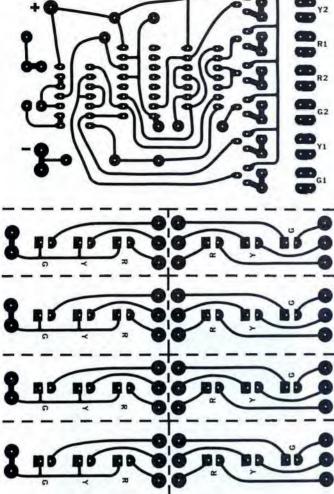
Actual-size foil pattern (above) and component layout (right). Board is divided into nine sections.
